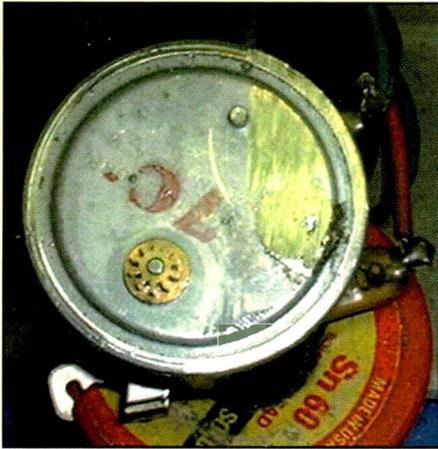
Photo K. The oiling hole must be sealed. Either silicone adhesive or solder can be used. Since this housing was brass, I opted to seal the hole with solder.
